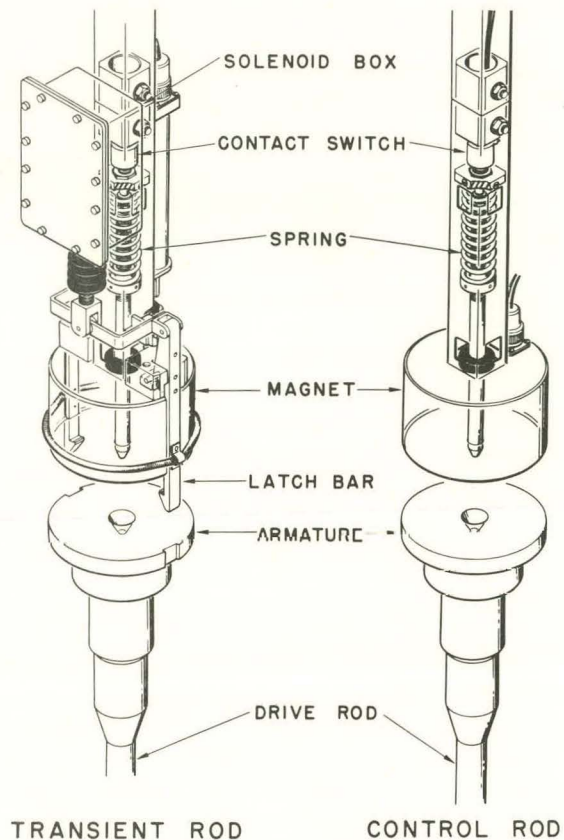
Control rod drive magnet assembly (NRTS-61-2870).
